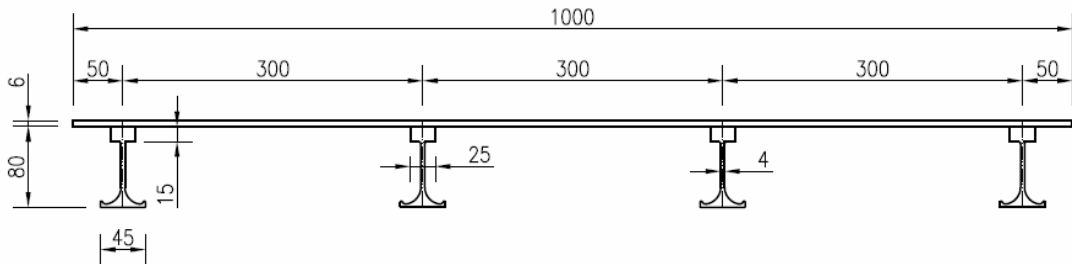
(c) Layout of test structure 19D1 for friction stir lap-joining in mm
